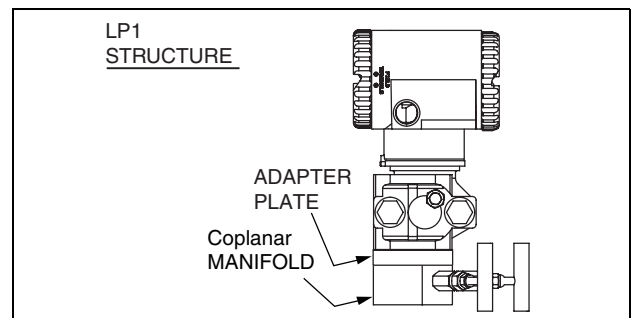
LP1 Shown Mounted to a Coplanar Manifold using an Optional Intermediate Adapter Plate
